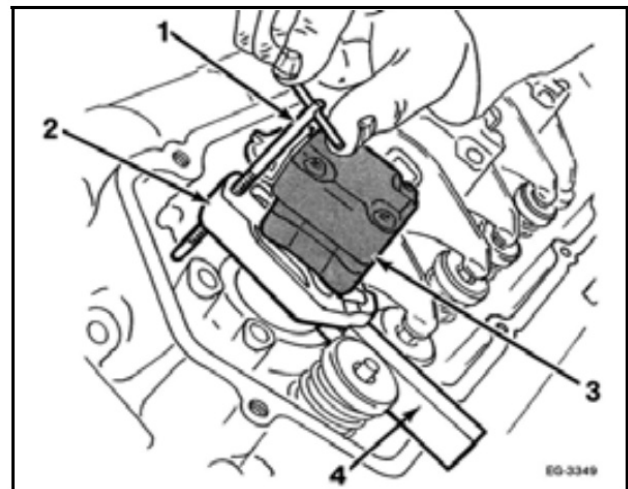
Installing the "T" Screw Into the Hold Down Clamp
